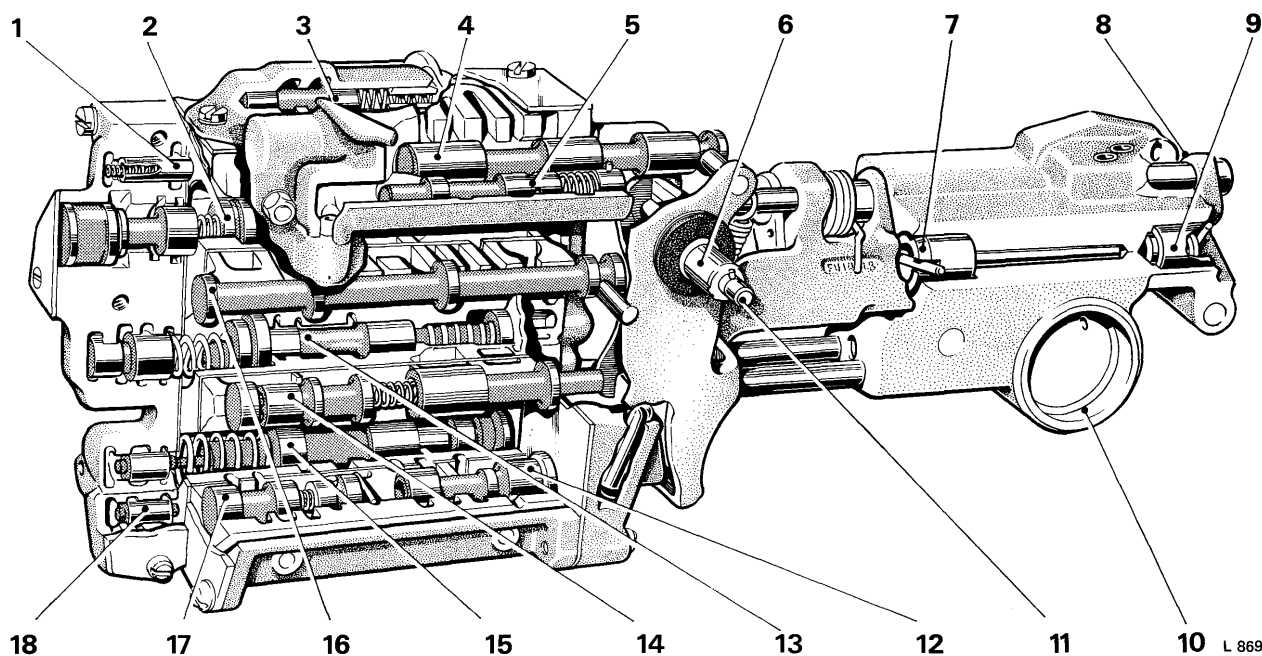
CONTROL VALVE UNIT ASSEMBLY
